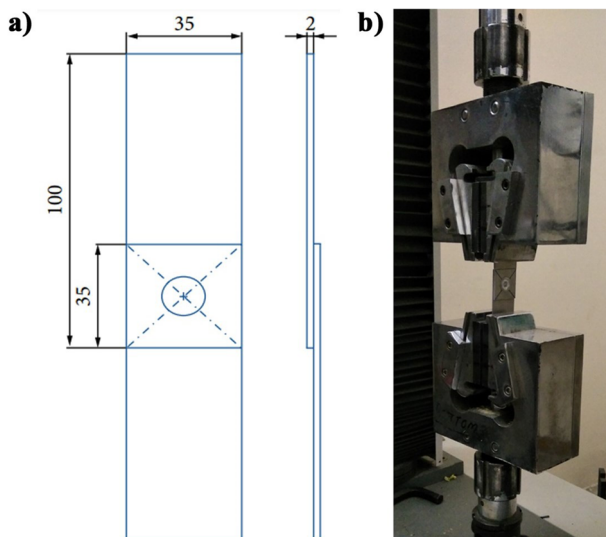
(a) Drawing showing the tensile-shear test specimen (dimensions in mm), and (b) photographic image of the specimen during the tensile-shear test.
